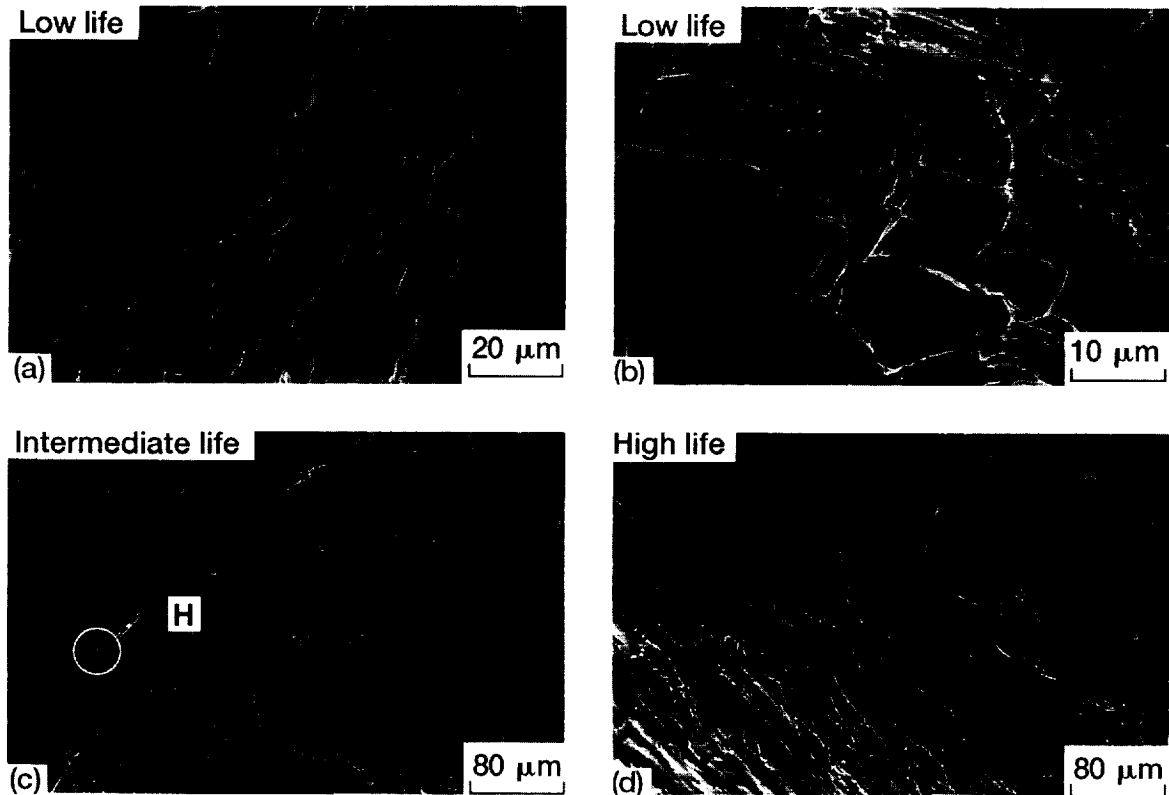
SEM fractographs showing (a) elongated dimples and (b) cleavage fracture in specimen A-8, (c) radial chevron cleavage in specimen C(5), and (d) river pattern cleavage in specimen B-17. The fracture origin is marked by H in Fig. 1(c).
